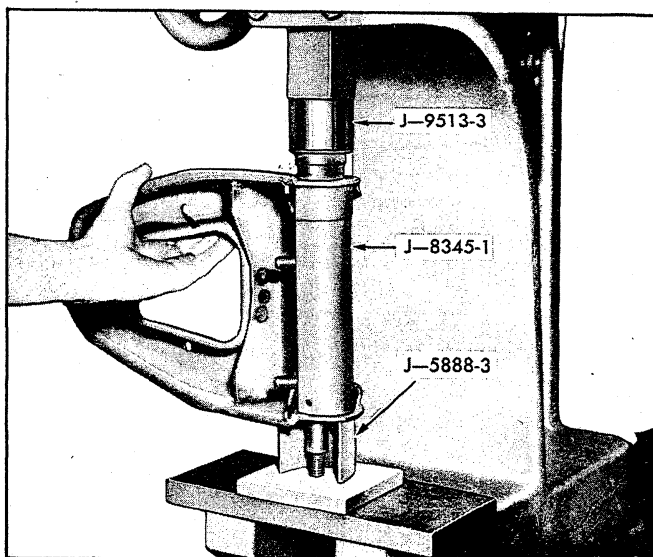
Installing Pivot Shaft Bushing - Chevy II
